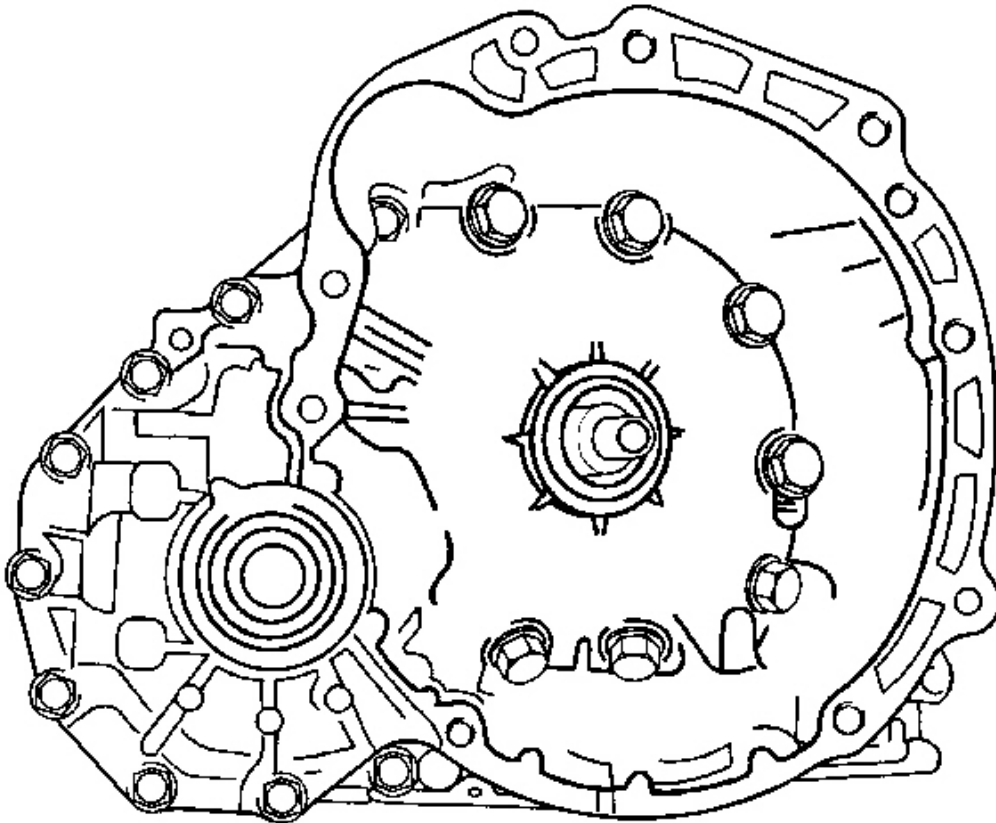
Transaxle Housing, Transaxle Case & Bolts
